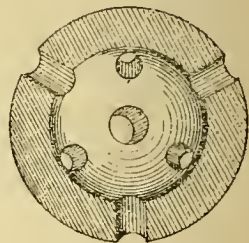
PLAN OR VIEW OF OUTSIDE OF BOTTOM OF POT.
